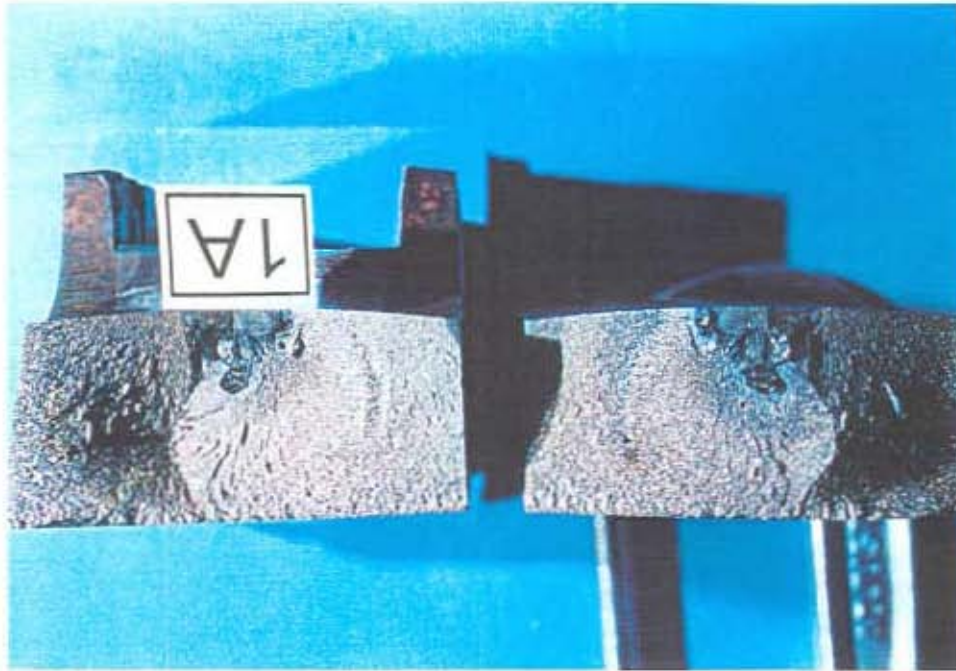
Exposed Crack Surfaces of the Defect Detected In the Weld Repair at Keyway 1A.
